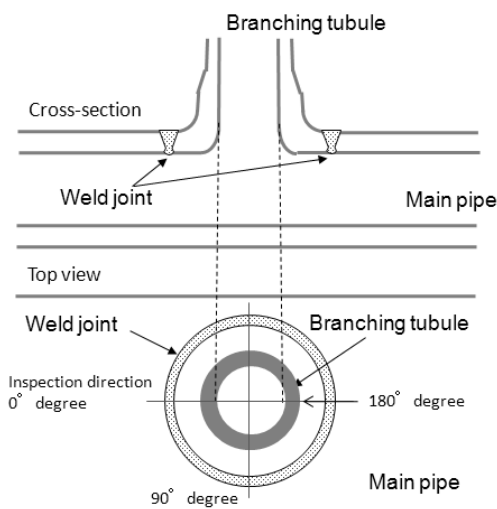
Inspection direction on saddle-shaped weld
